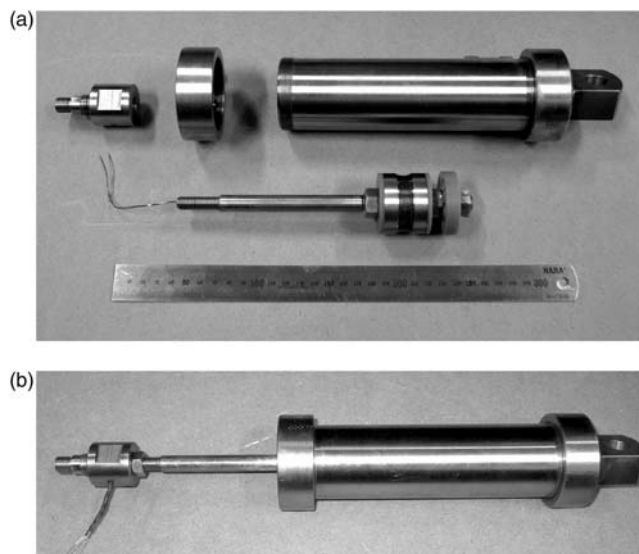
Appearances of the MR damper. (a) Parts, (b) Assembly.
